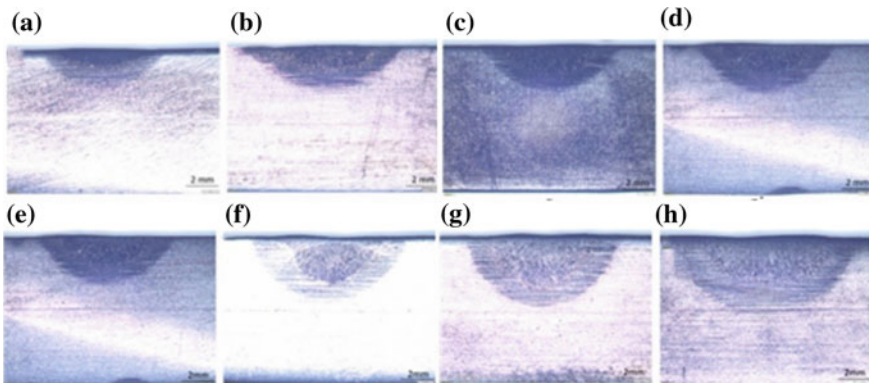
Macrostructures of the weld cross section of the weldments welded at “welding speed-120 mm/min and welding current a 120 A, b 140 A, c 160 A, d 180 A without flux”; and “welding current of 180 A and welding speed of 120 mm/min e without flux, f with flux TiO₂, g with flux Cr₂O₃, h with flux SiO₂”
